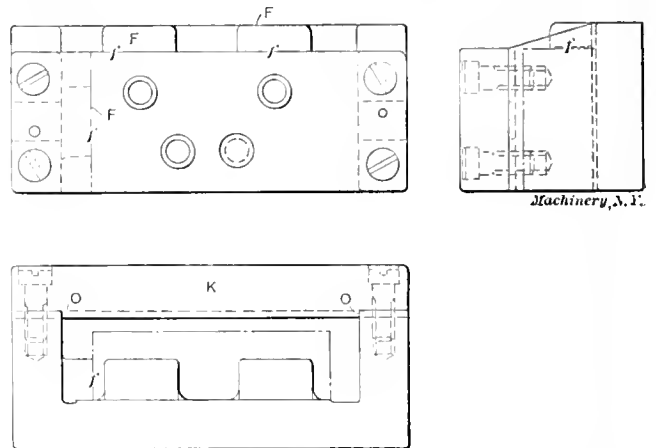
Alternative Design of Jig shown in Fig. 86.
